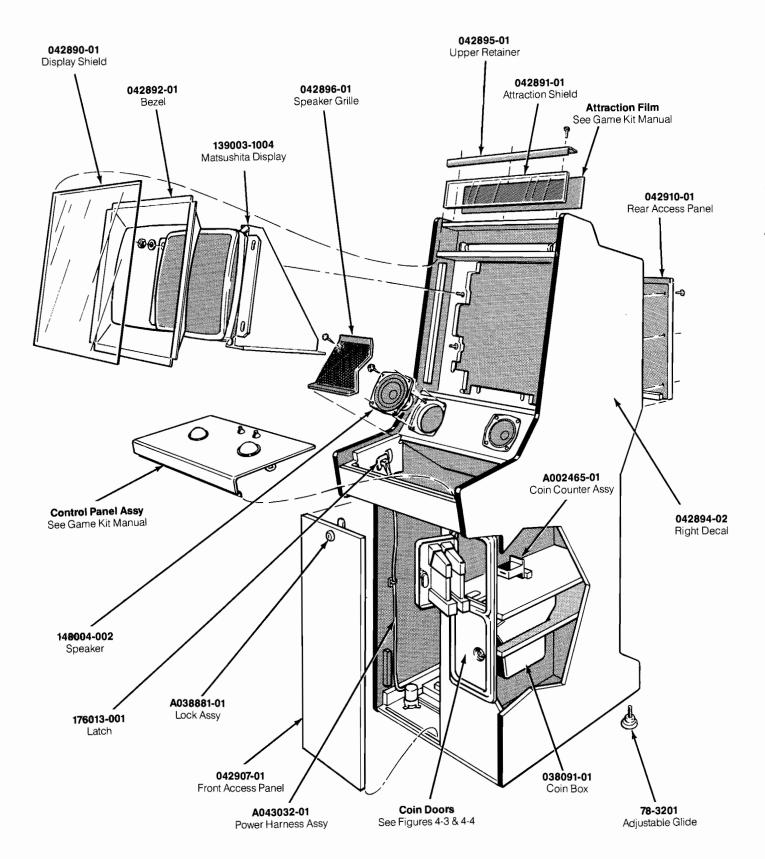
Cabinet-Mounted Assemblies A042880-01 A
